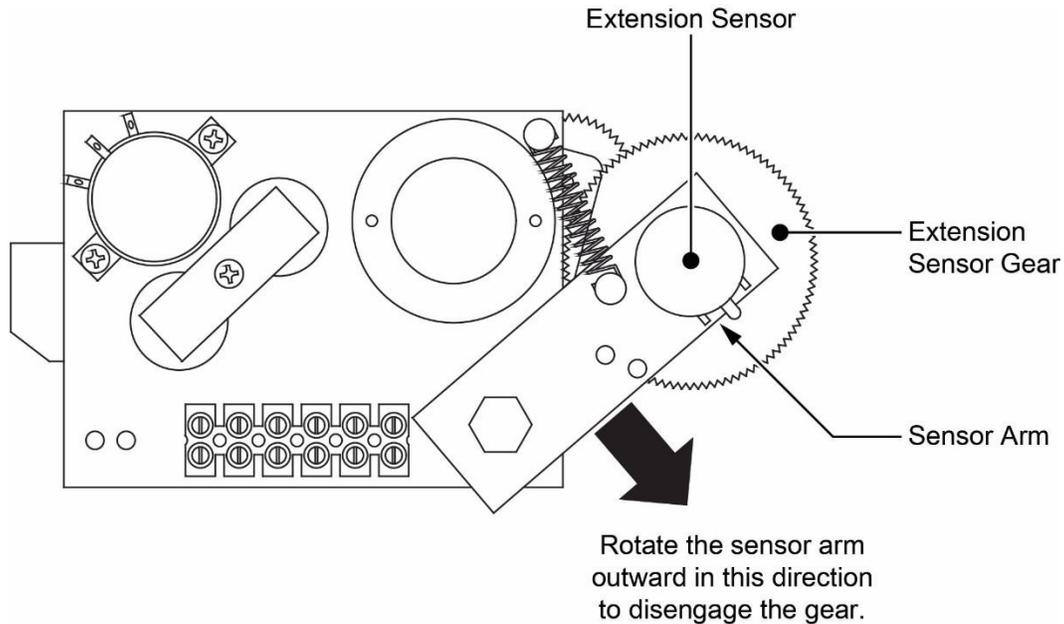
SENSOR BASEPLATE ASSEMBLY
